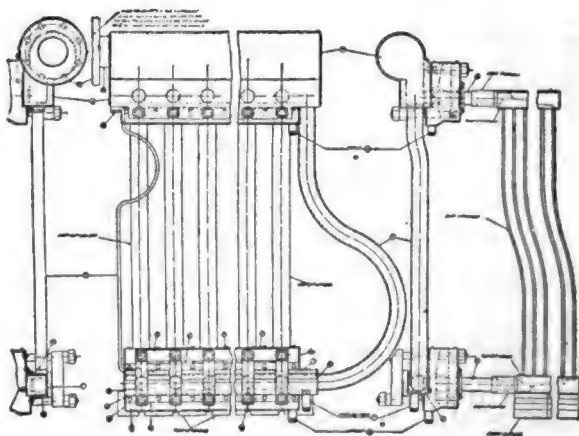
ASSEMBLY OF EXPERIMENTAL MERCURY BOILER.
